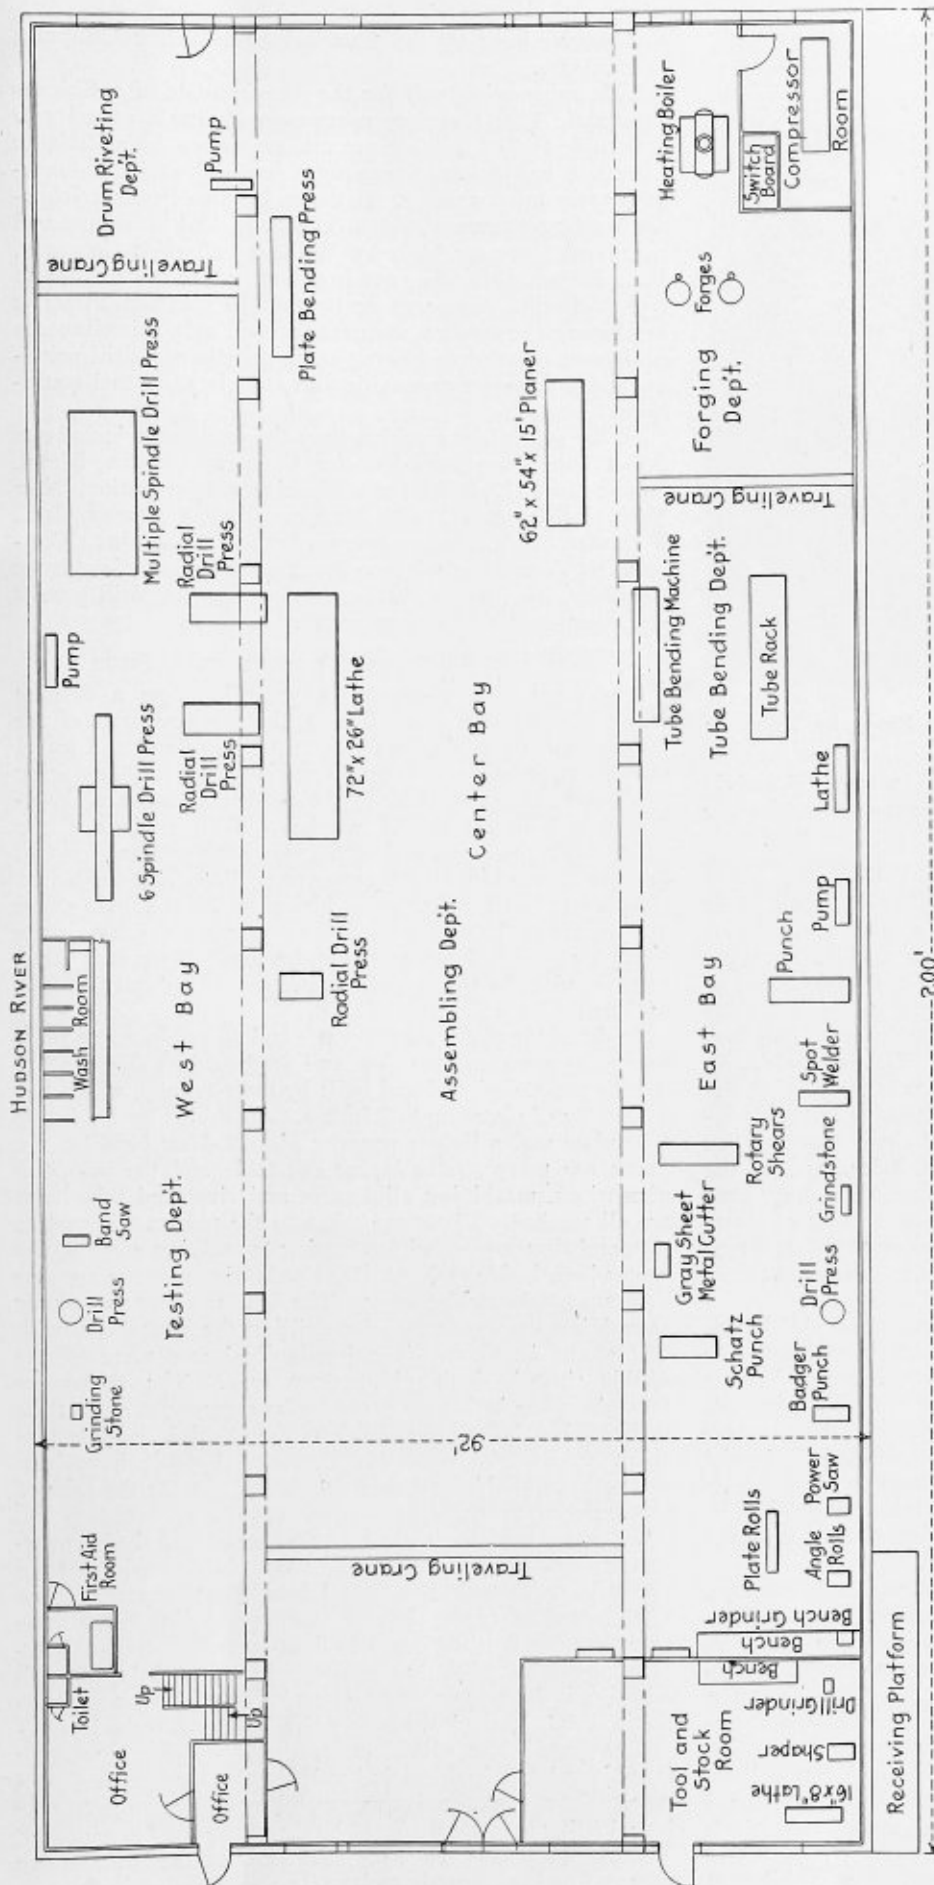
General Floor Layout of New York Engineering Company Shop at Yonkers
